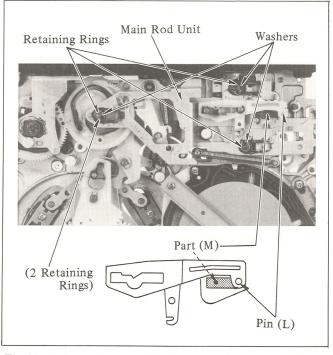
Assembly and Adjustment of Gears and Rods-(9)
